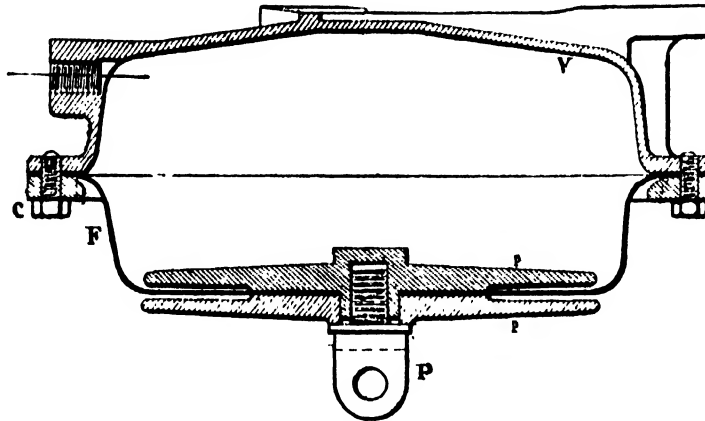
Section through Brake Cylinder of Soulerin Brake
